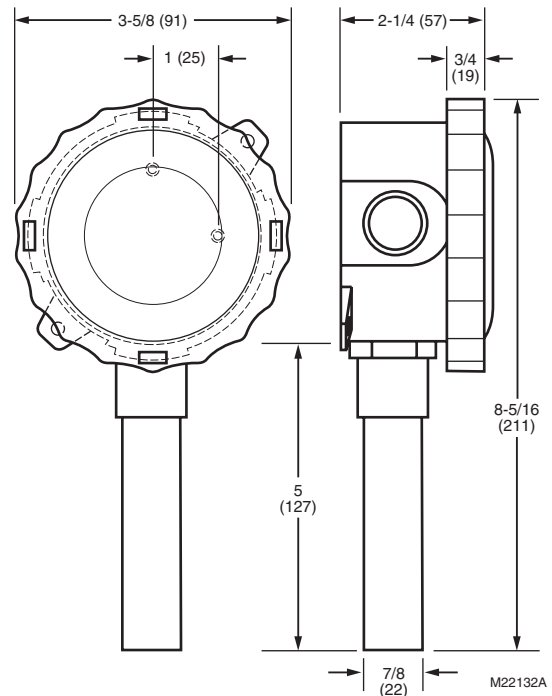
T775-SENS-OAT Dimensions in Inches (mm).
